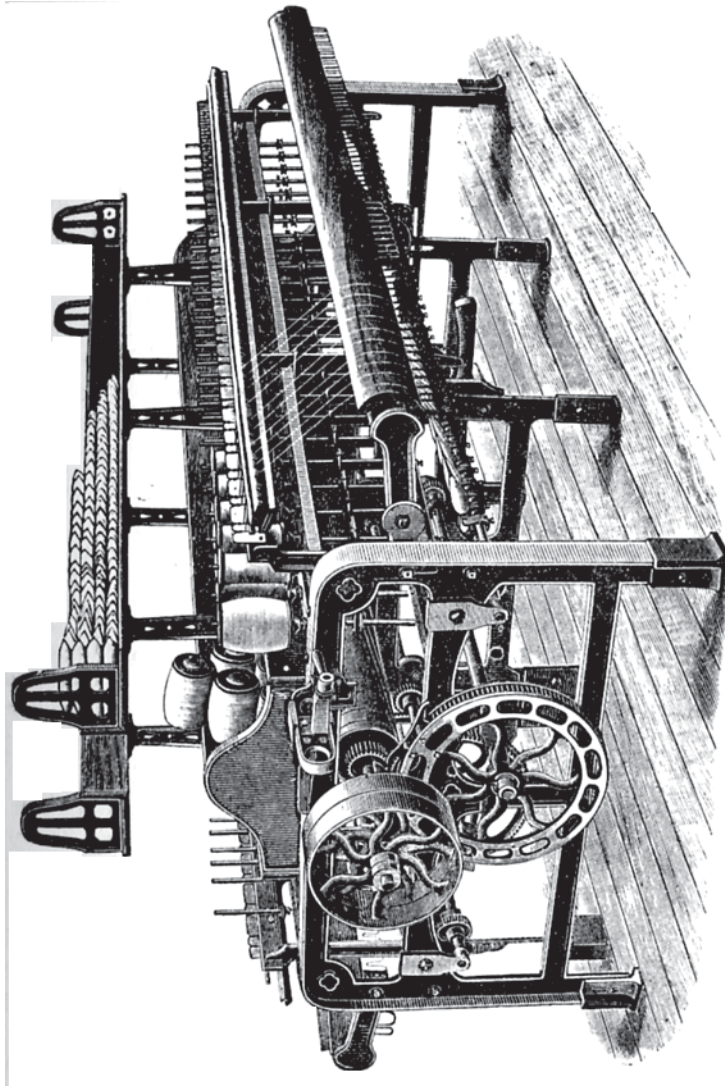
COP OR BOBBIN WINDING MACHINE.
